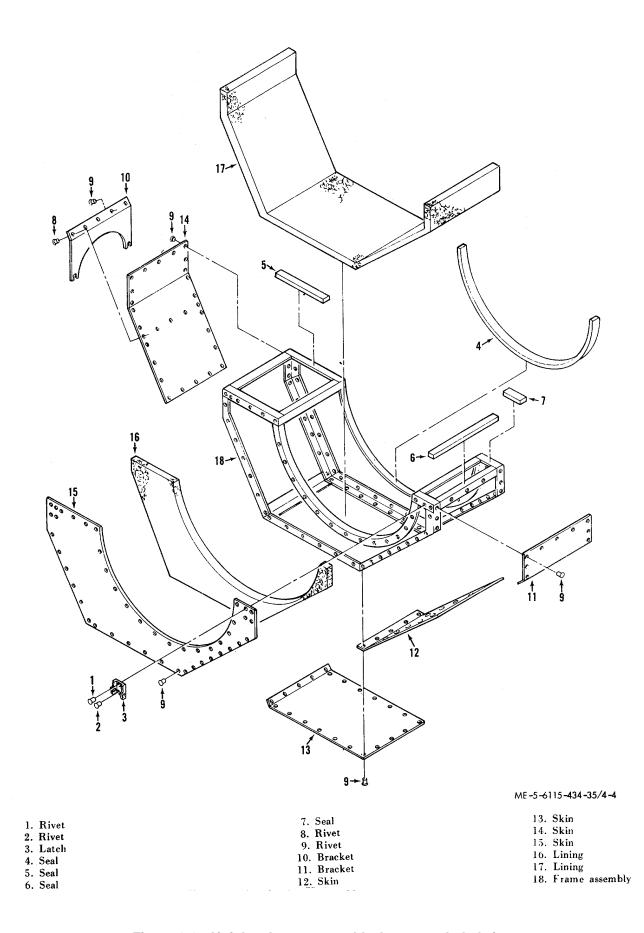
Air inlet plenum assembly, lower, exploded view 4-7
